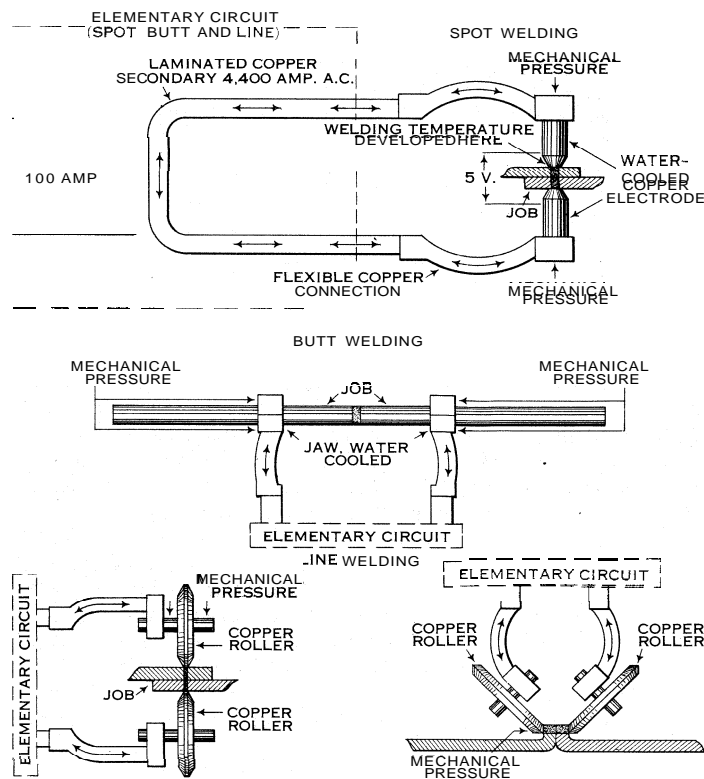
DIAGRAMS OF CIRCUITS OF VARIOUS WELDING MACHINES
